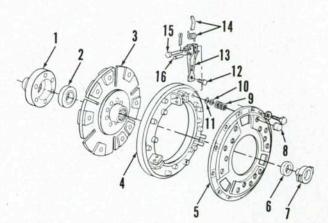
Exploded view of clutch assembly used on TW-15, TW-25 and TW-35 tractors.
